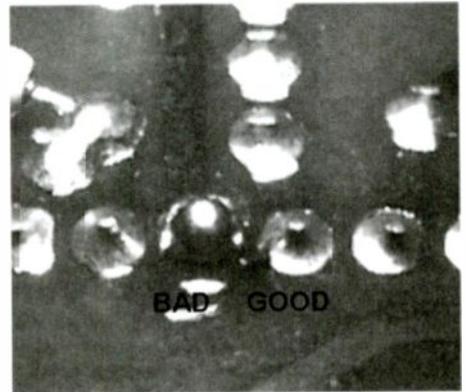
Bad high contact angle "bubble" on left; good solder joint on right later.
